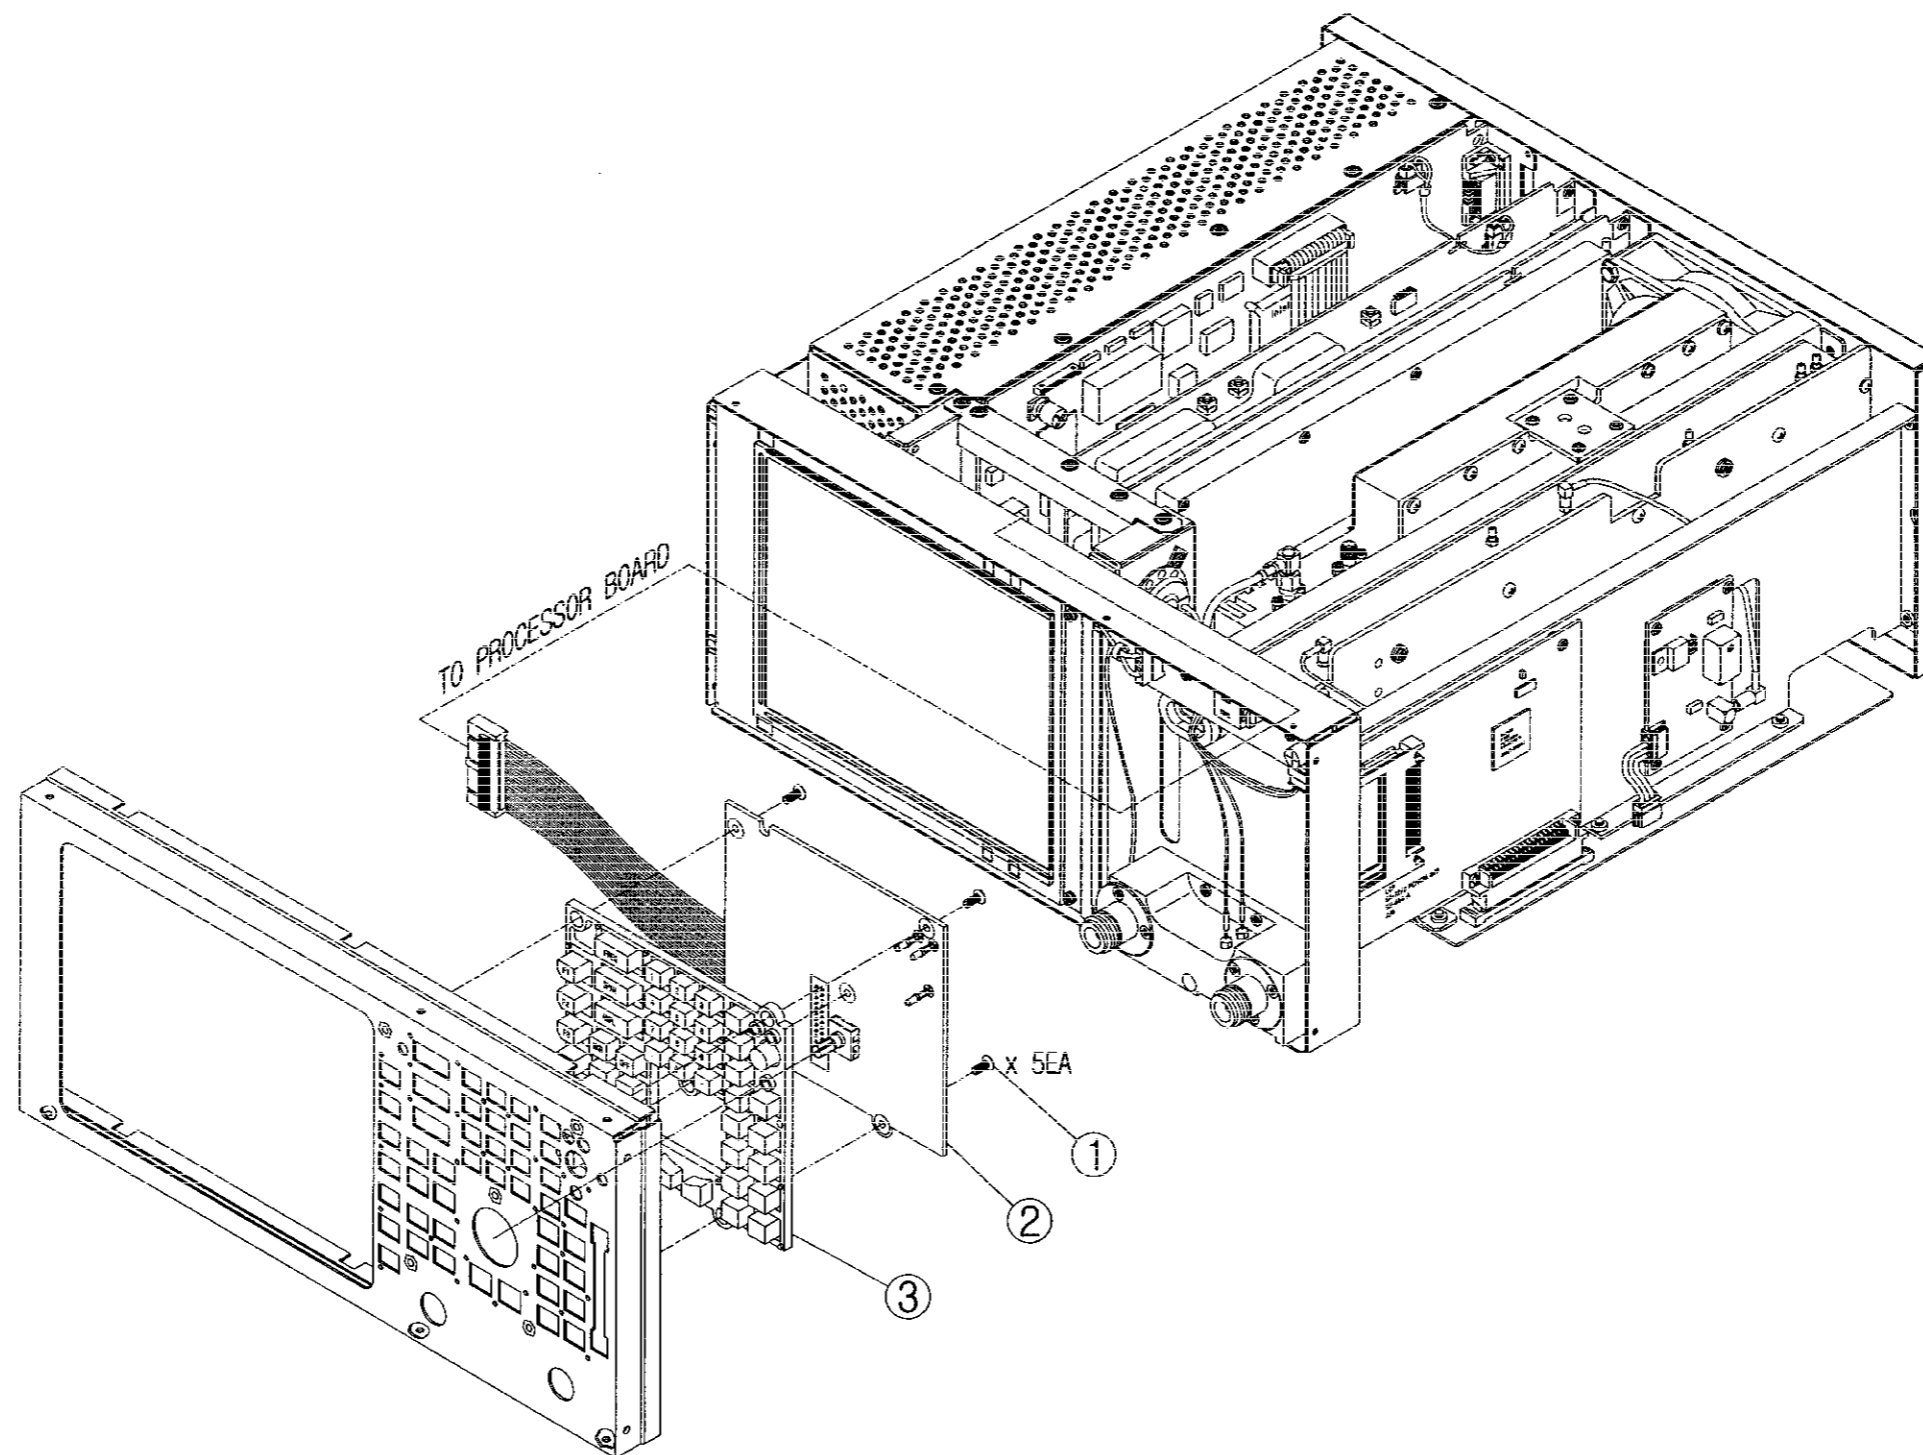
KEYPAD BOARD ASSEMBLY
